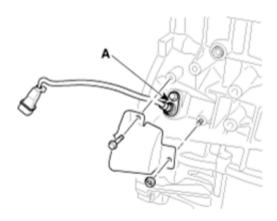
Identifying CKP Sensor Courtesy of KIA MOTORS AMERICA, INC.
